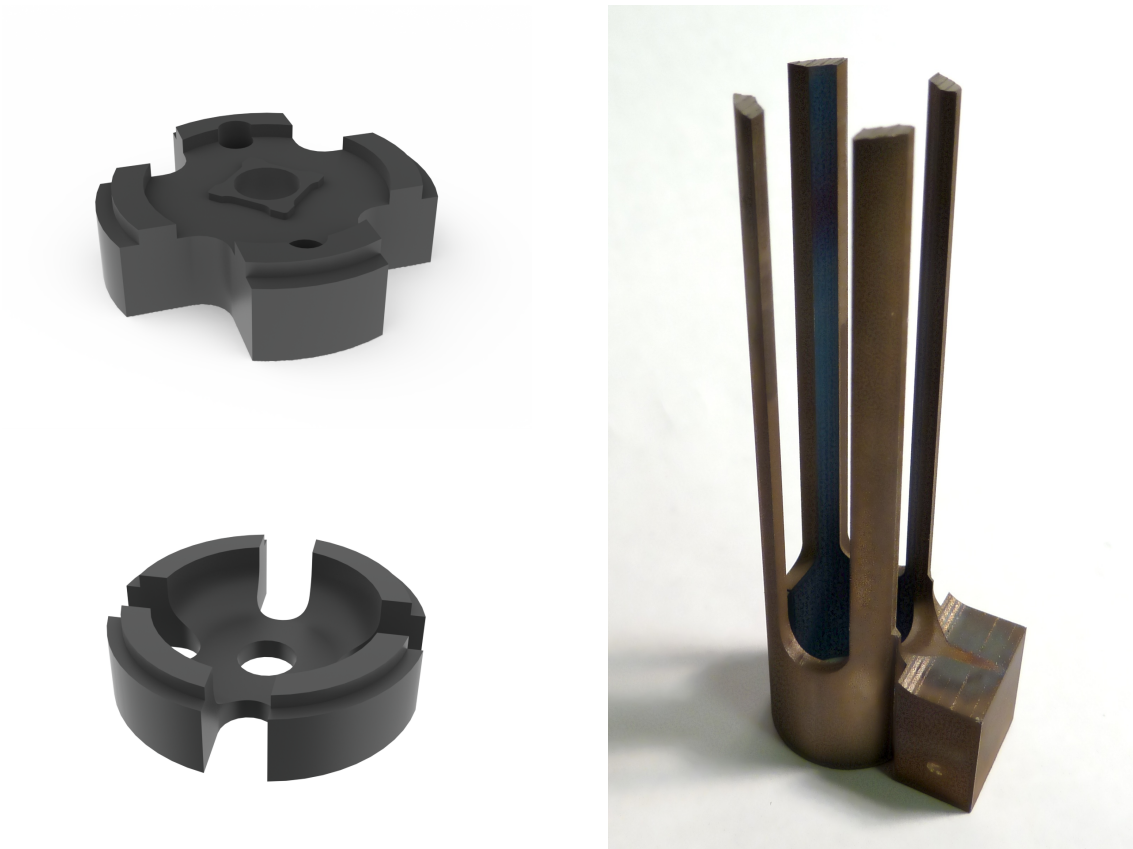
The front (bottom left) and rear (top left) endcaps bear spacing rings to keep the inner magnets centered; the rear endcap also has cutouts to admit the motor assembly tool (right). The square feature on the rear endcap aligns it to the inner magnets, while the bowl-shaped indentation on the front endcap leaves space for a nut and washer below it, which keep the rear endcap attached while the front endcap is removed. The motor is mounted to the application by the two M3 threaded holes in the rear endcap.
